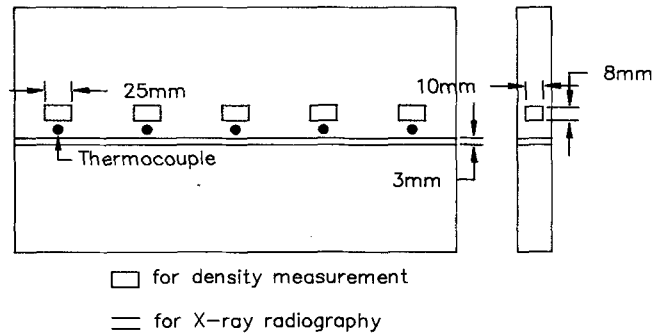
Locations of test pieces for X-ray radiography and density measurement.
